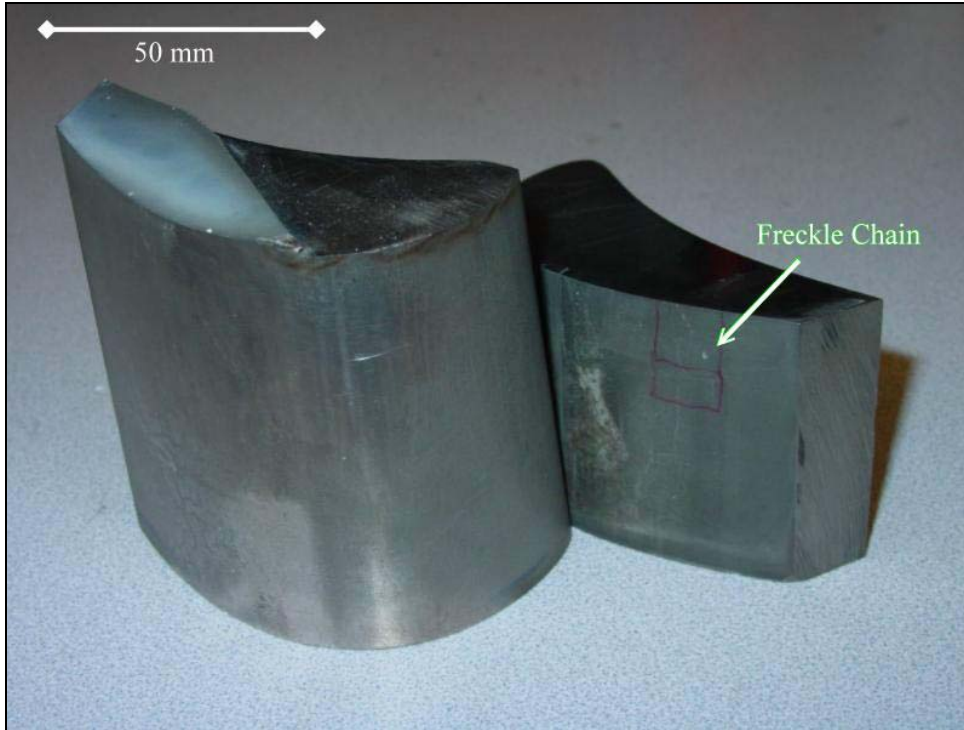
Photograph of the DS-1 castings and a labeled freckle chain.
